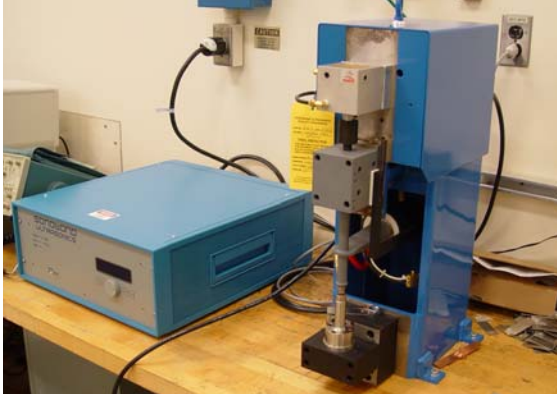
The Sonobond ultrasonic welder used in this program.
